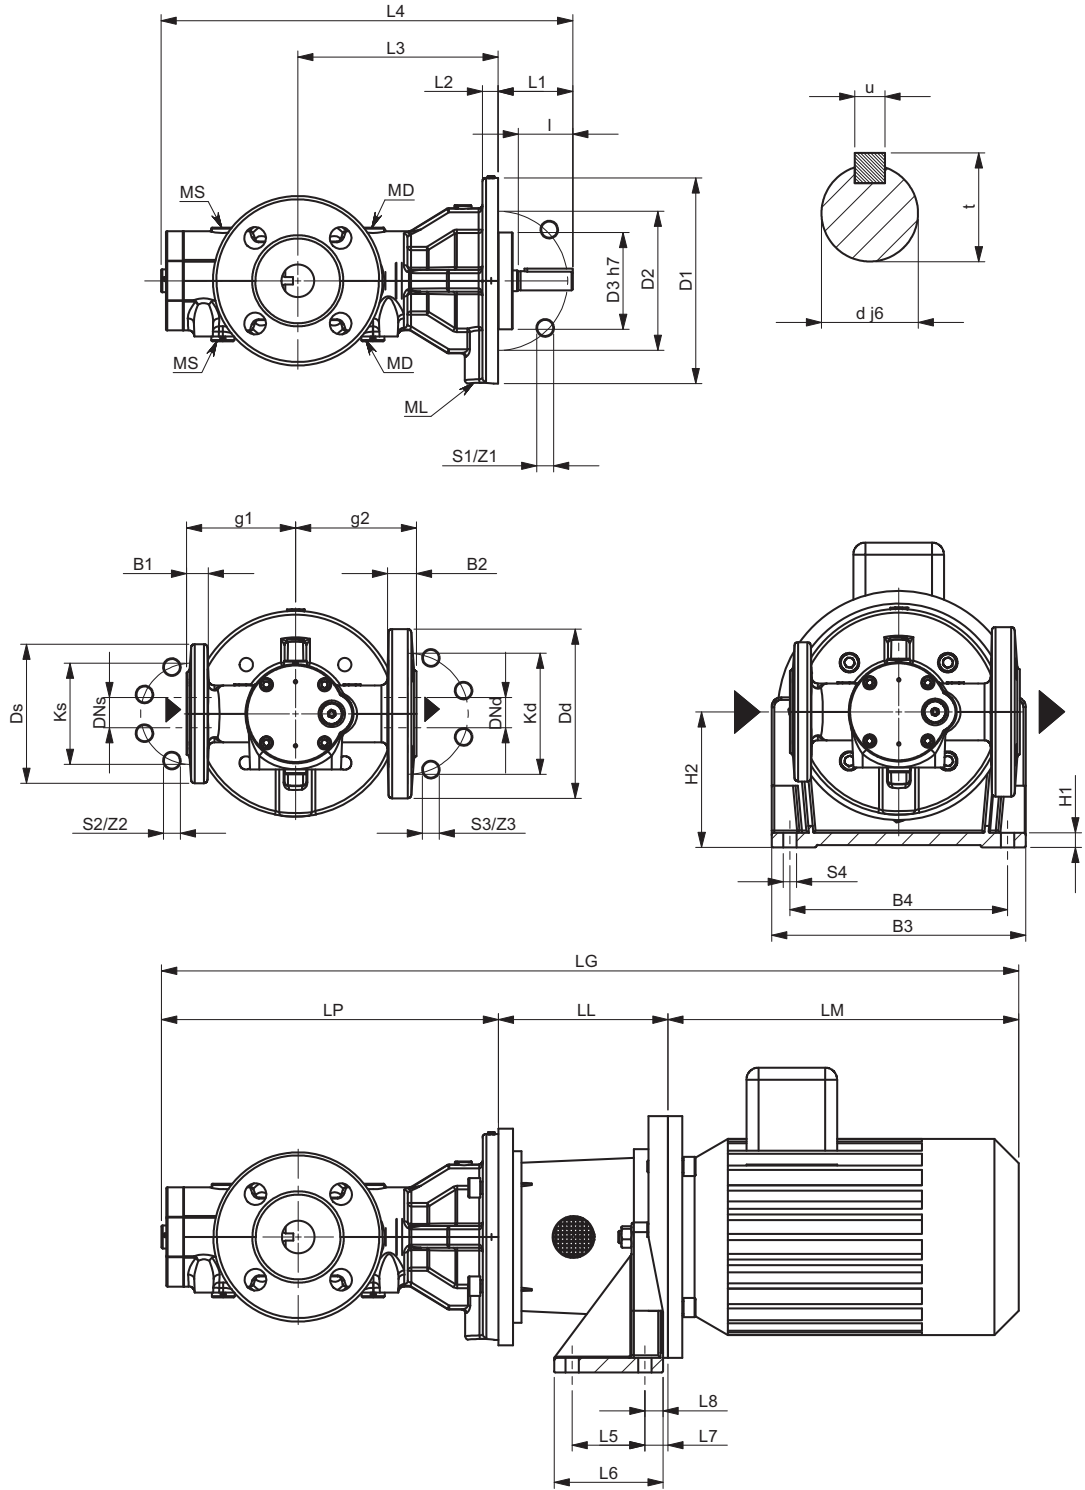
Dimensional drawing of LFI-pump and pump unit
